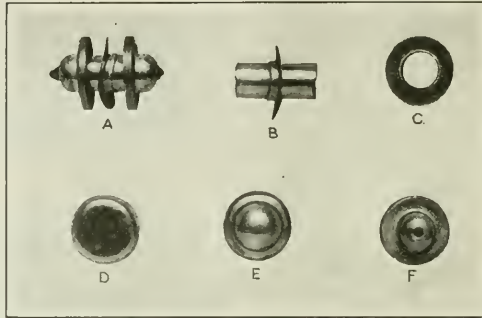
Sheet-metal Products of Forming and Assembling Dies
